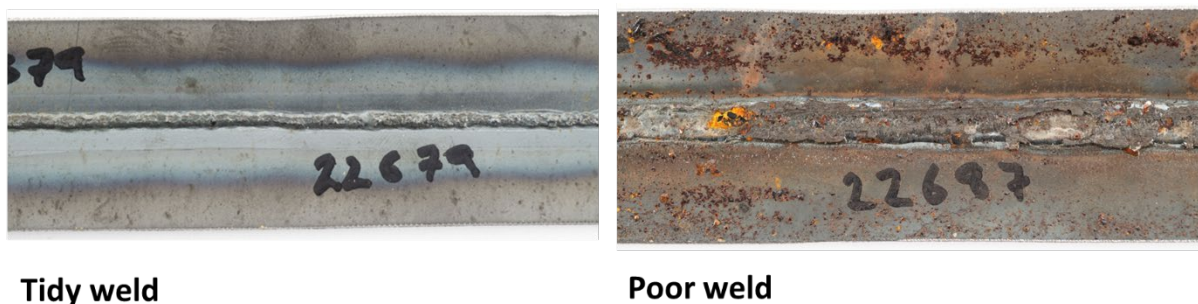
Photographs comparing the appearance of a good quality weld and a poor quality weld
